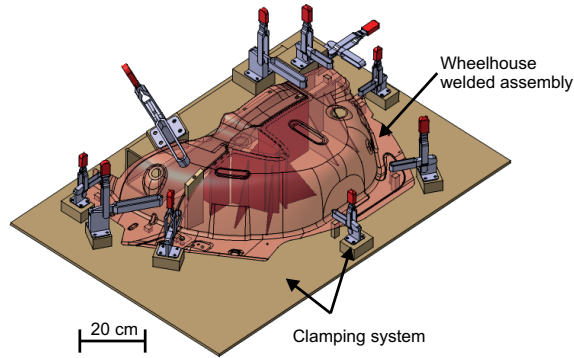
Reproduction of the real clamping fixture for the wheelhouse welded assembly
